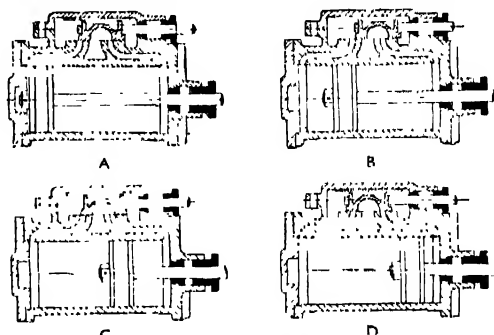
STEAM VALVE ACTION. A simple valve shown in various positions of stroke; A, valve admitting steam; B, valve full open for steam; C, valve closed for steam; D, valve closed for exhaust.
